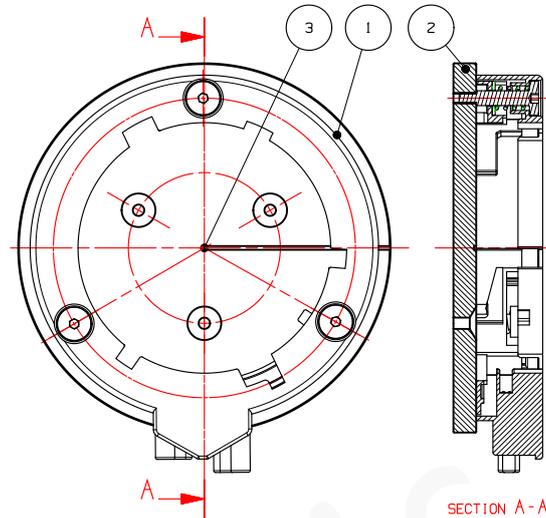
Definition of Test Fixture TPTF-PHJ65d-x — composition
